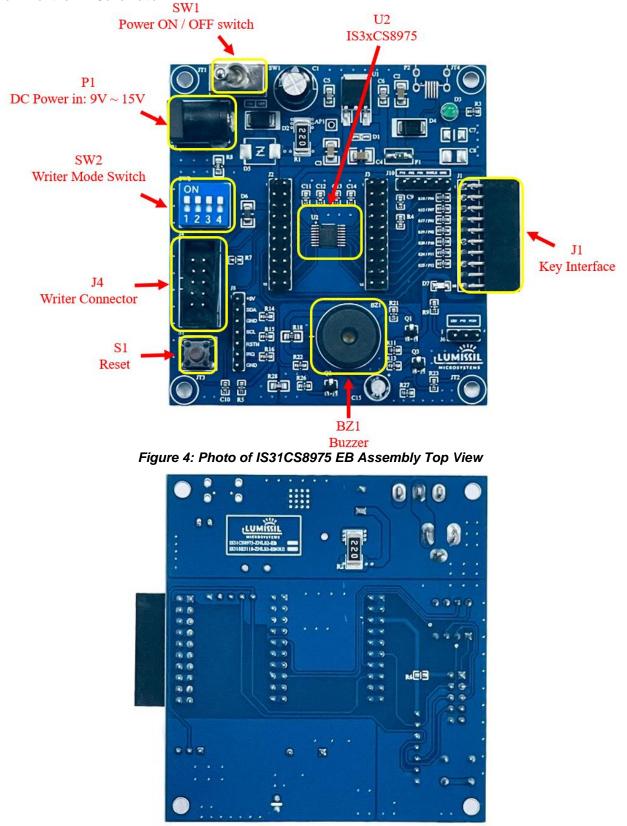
Photo of IS31CS8975 EB Assembly Bottom View
